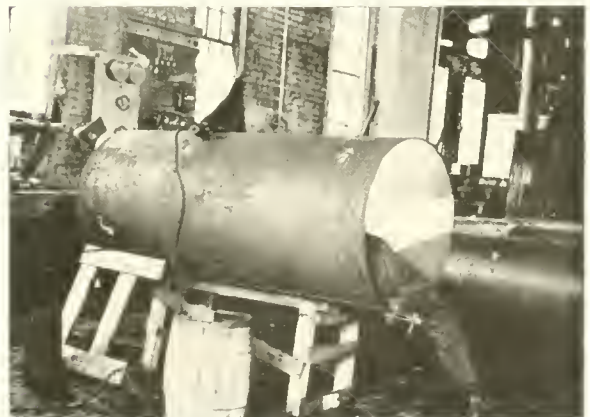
Cylindrical Tank in process of welding. This shows an ingenious method of mounting the tank on a "horse" and clamping the edges of the sheets by means of two plates secured together by bolts.
